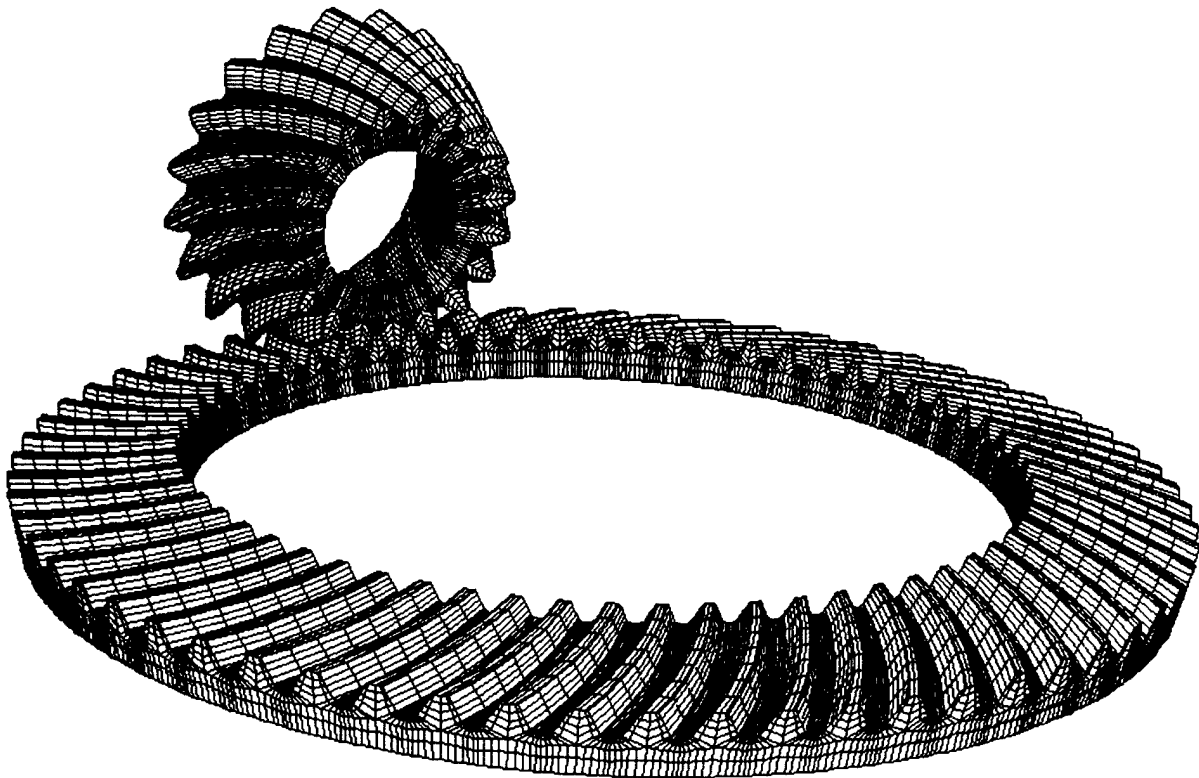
Whole finite element mesh of the formate-cut spiral bevel gear drive of design FTD1.
